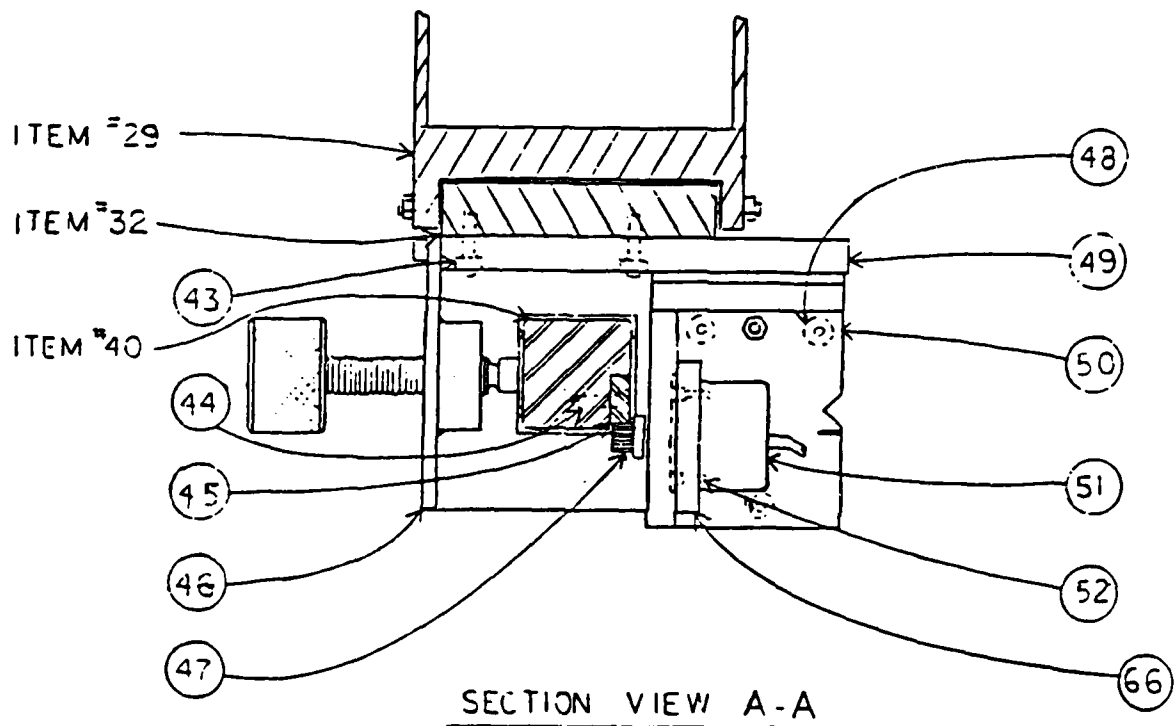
Cross-sectional detail of the horizontal axis slide assembly located at A on Figure B-1.
